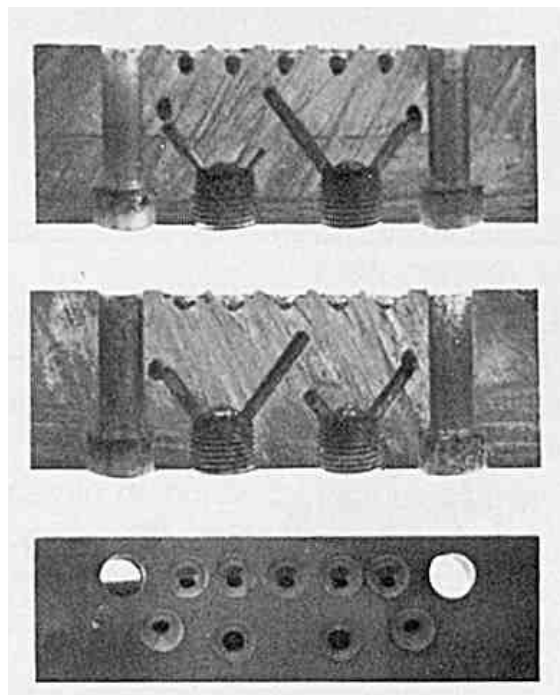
Block with blind holes; at bottom is a surface view; the top and middle photos show a cross-section of the same part cut in half. Part is about  $1.25 \times 4.0$  cm.
